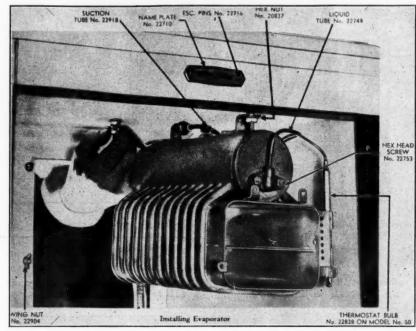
In installing evaporator, excessive tipping should be avoided.
